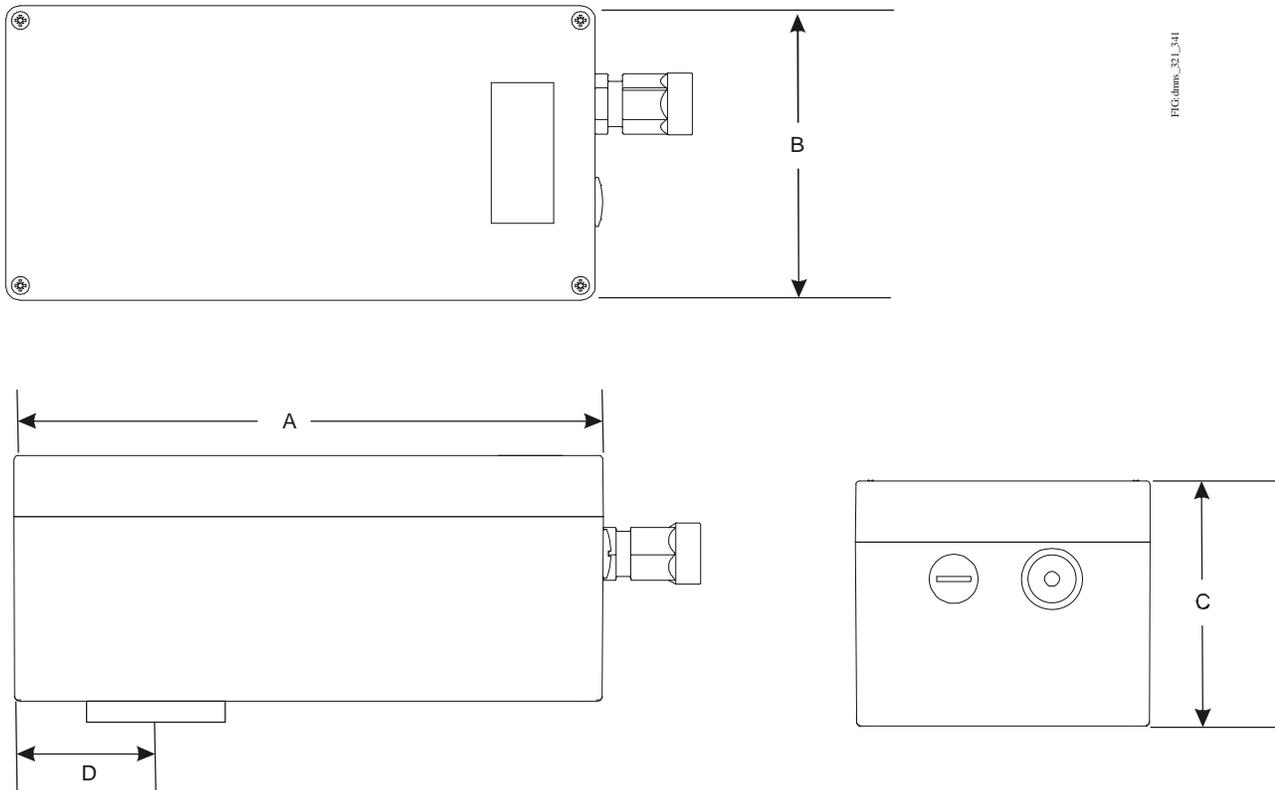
M9000-330 and M9000-340 Weather Shield Enclosure Dimensions, in. (mm)
